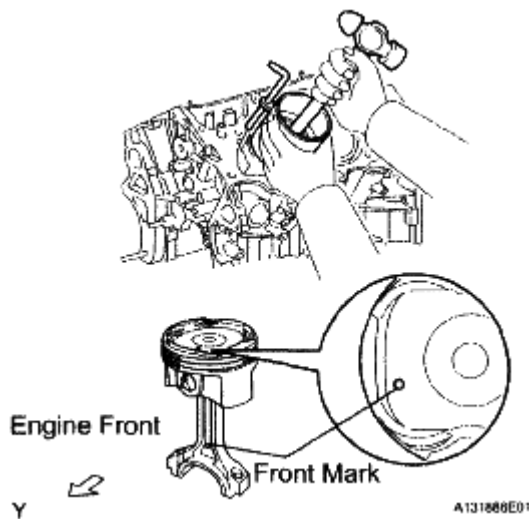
Pushing Piston And Connecting Rod Assembly Into Cylinder
